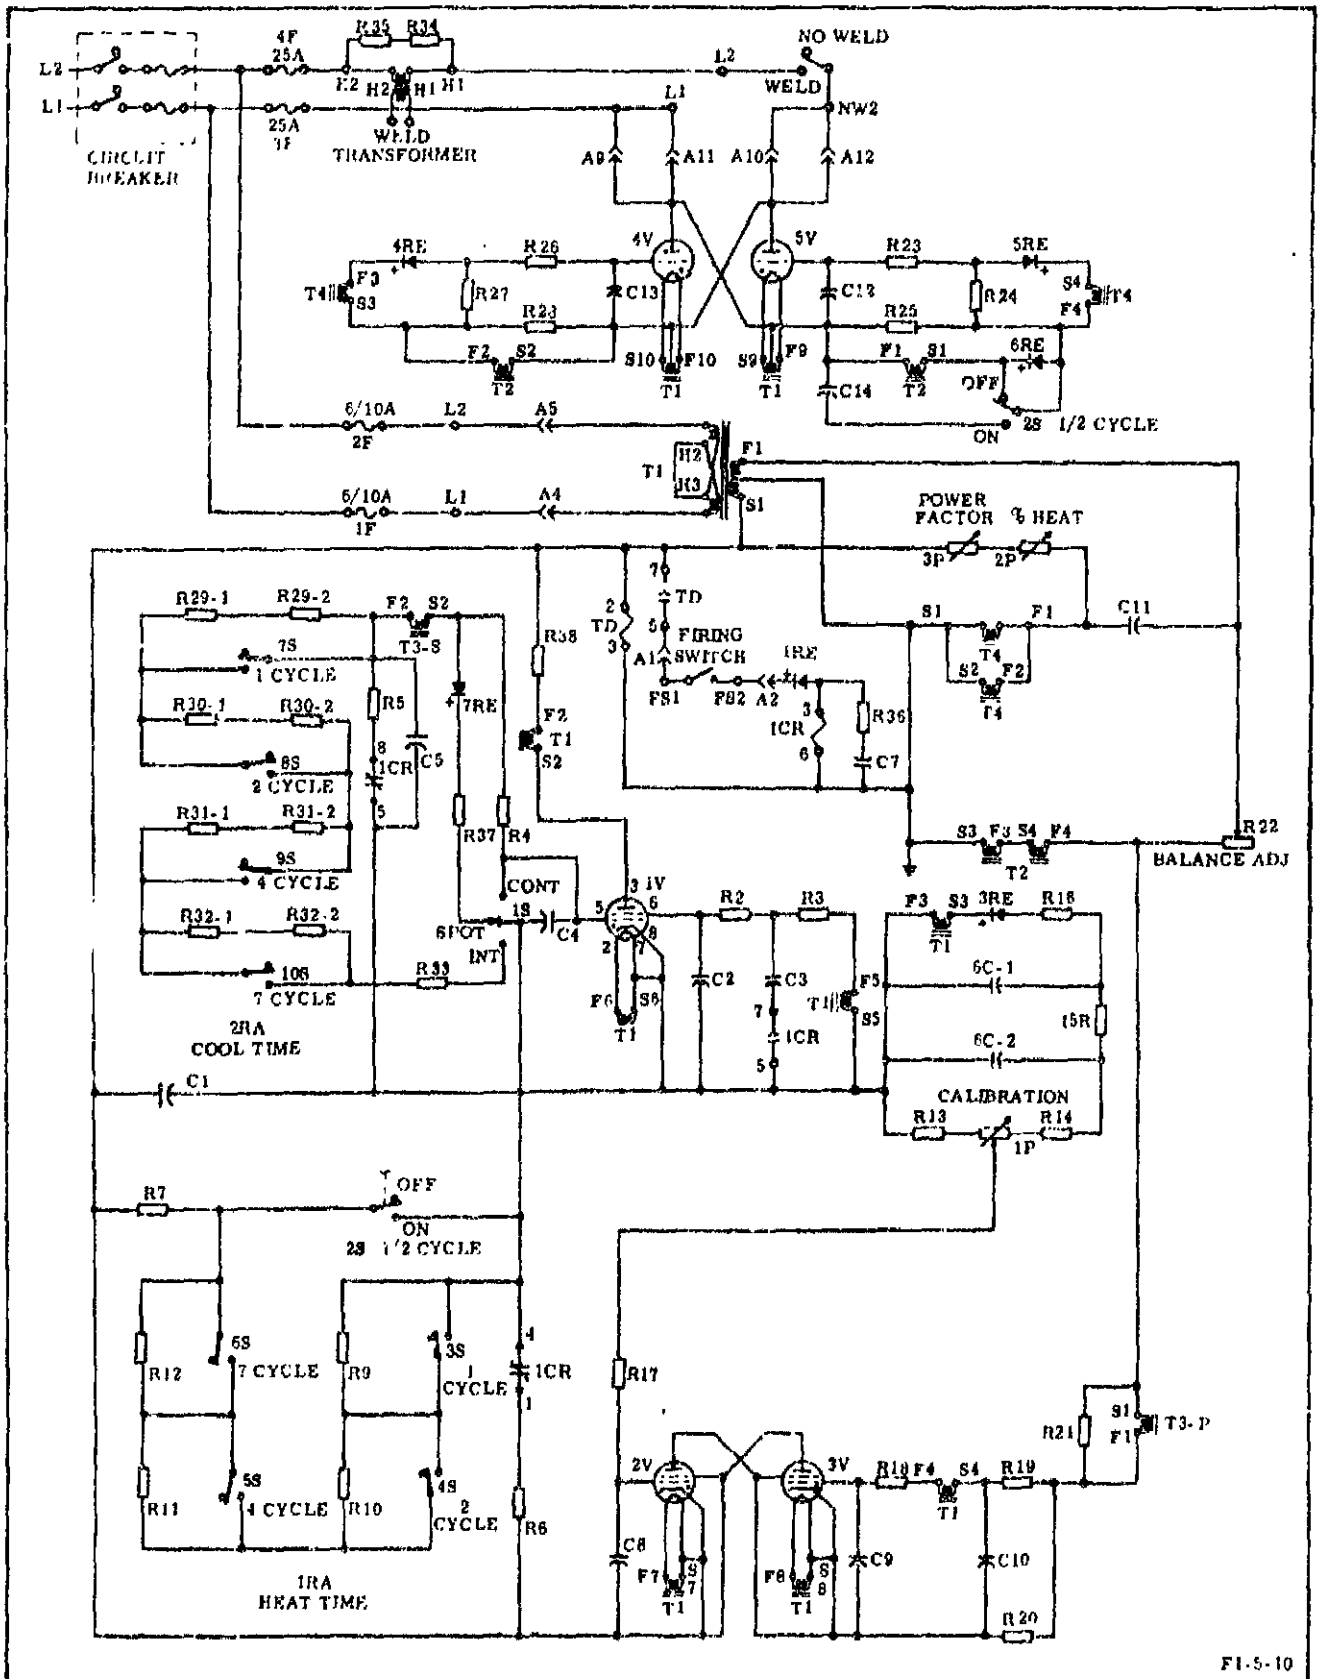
Components Welding Set 9026560 Electrical Schematic
